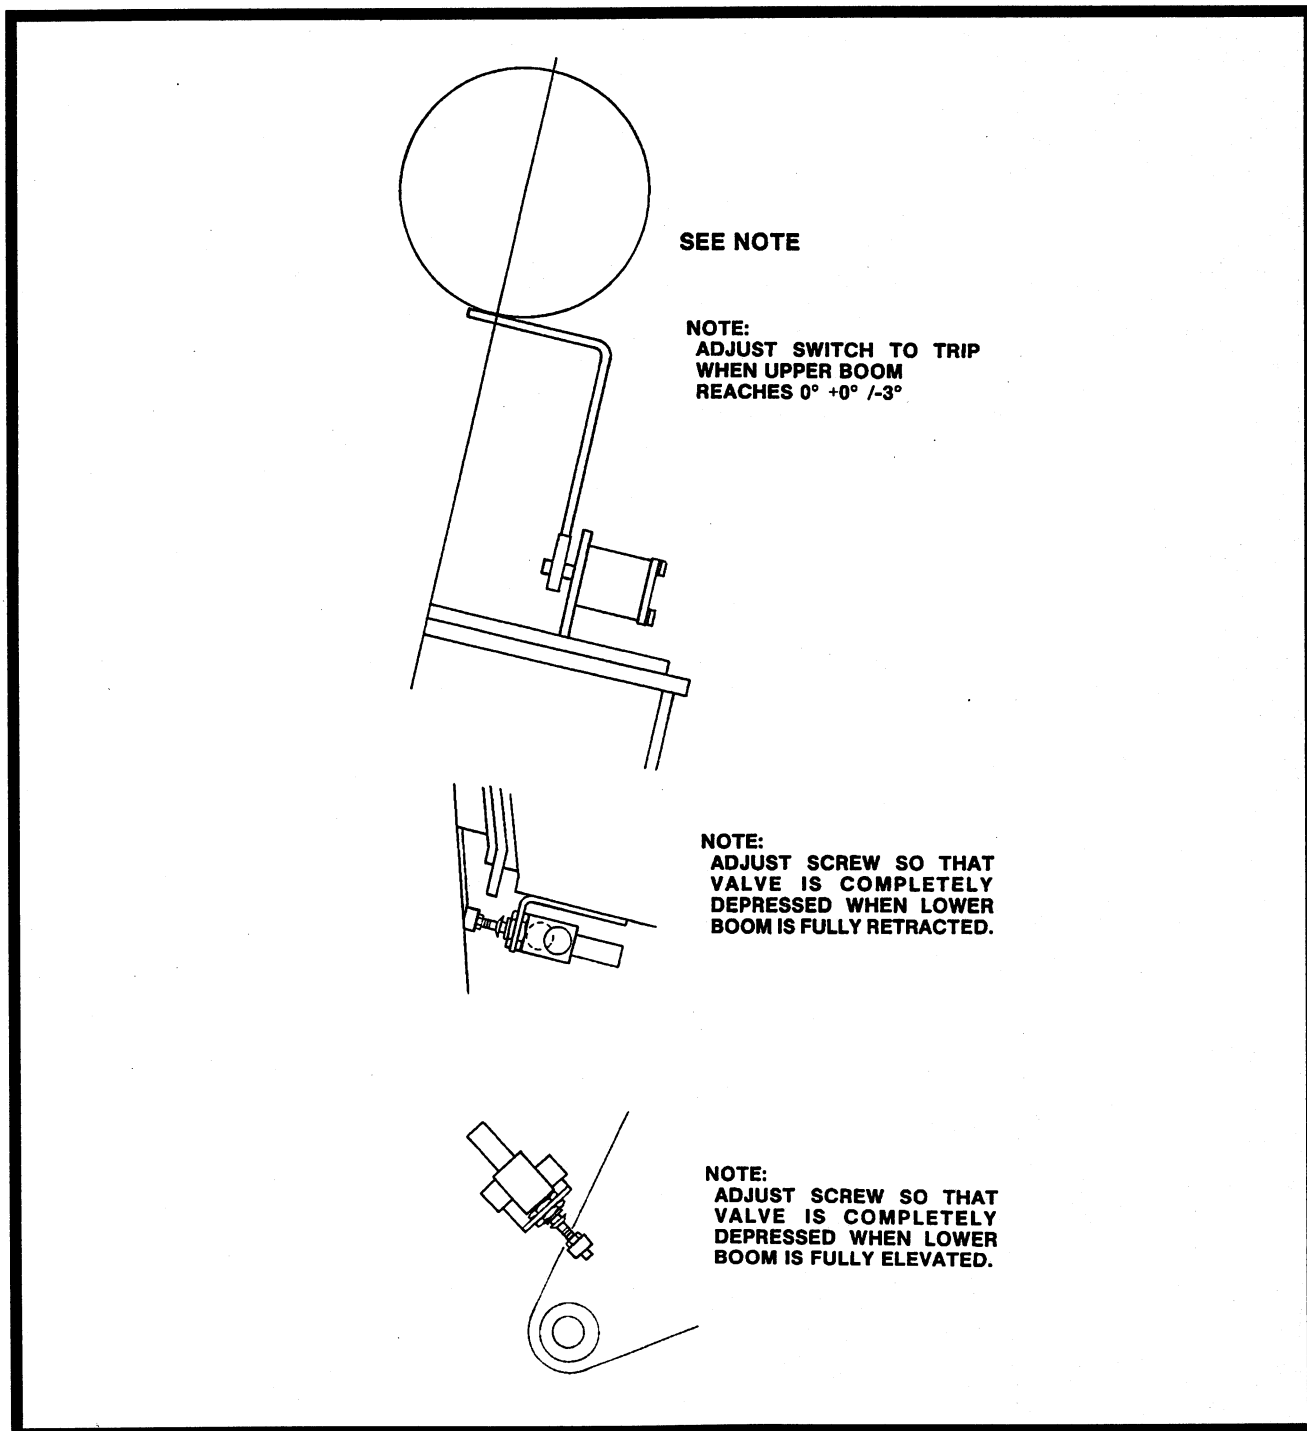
Tower Boom Limit Cam Valve Adjustment.
